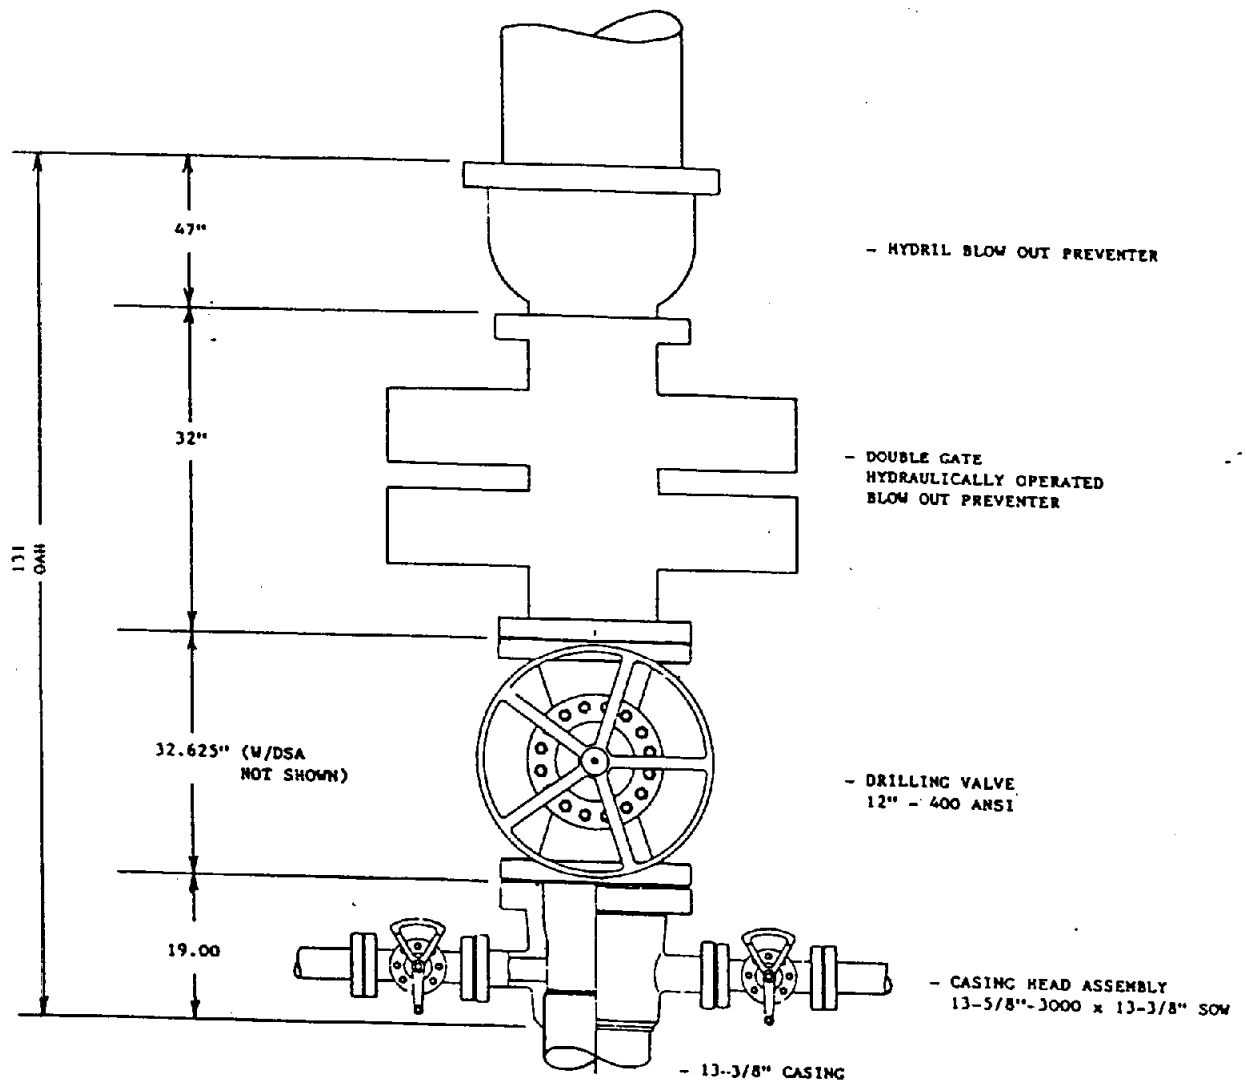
Blow Out Preventer and Wellhead Assembly for 13-3/8 in. Casing
